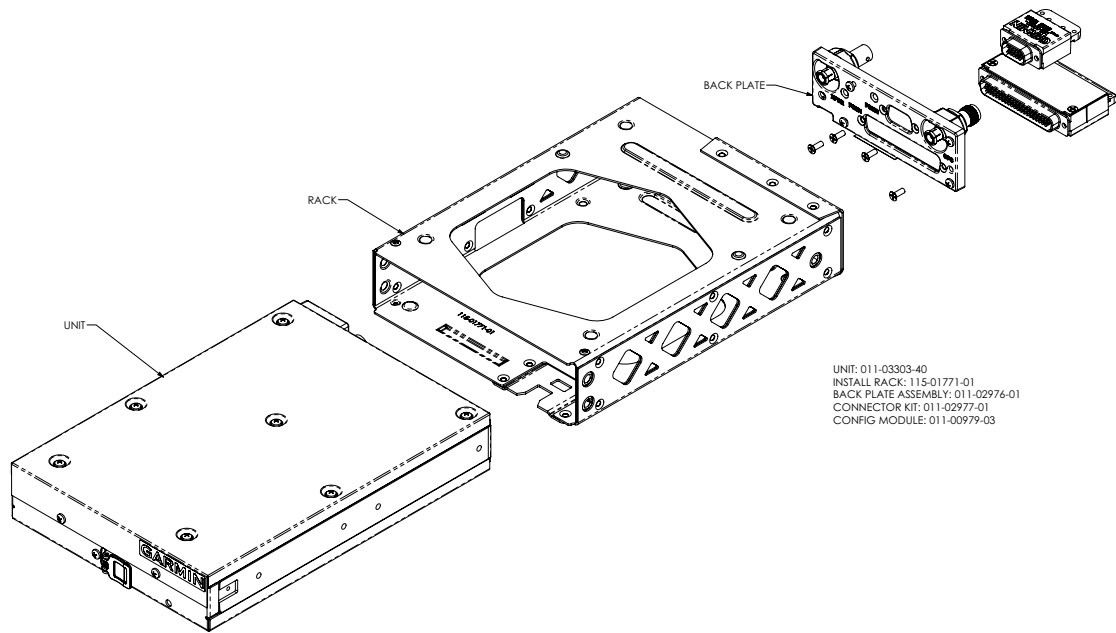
GTX 3X5R Standard Mounting Rack/Connector Assembly
